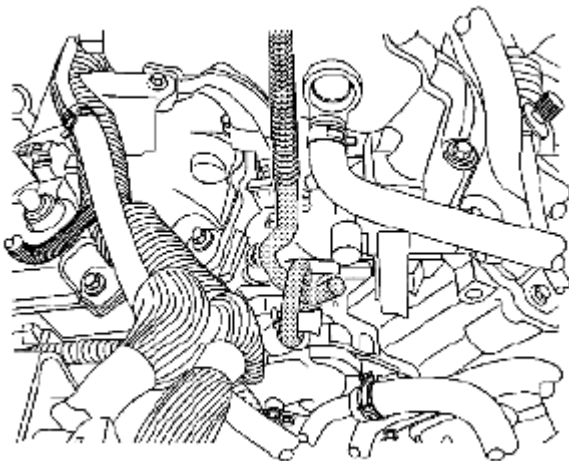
Identifying J 28467-7A Lift Hook And Rear Engine Lift Bracket J-42451-1
